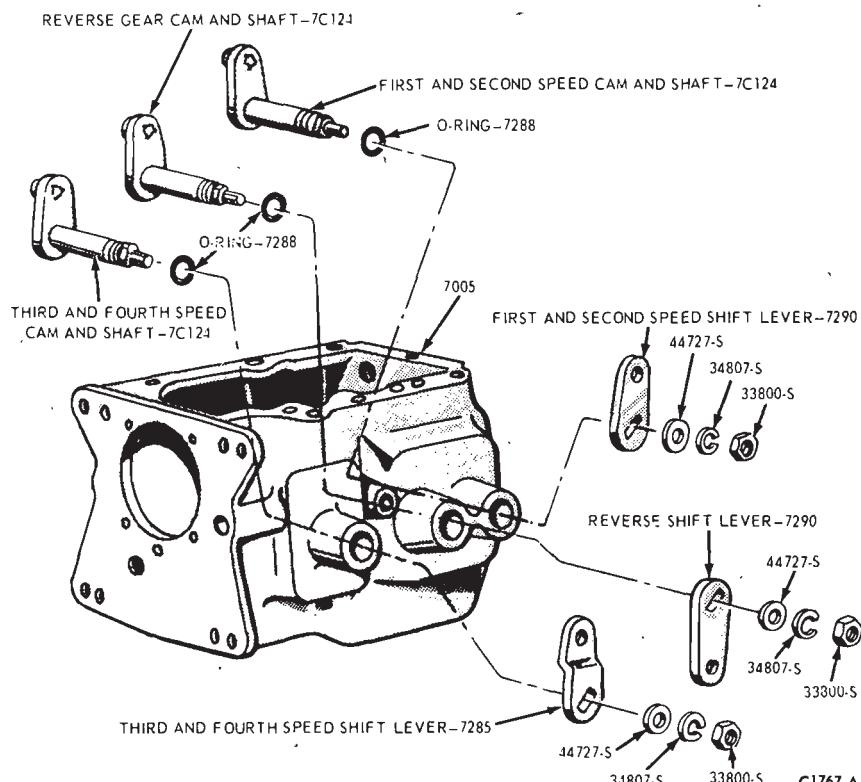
Cam and Shafts and Shift Levers Disassembled
